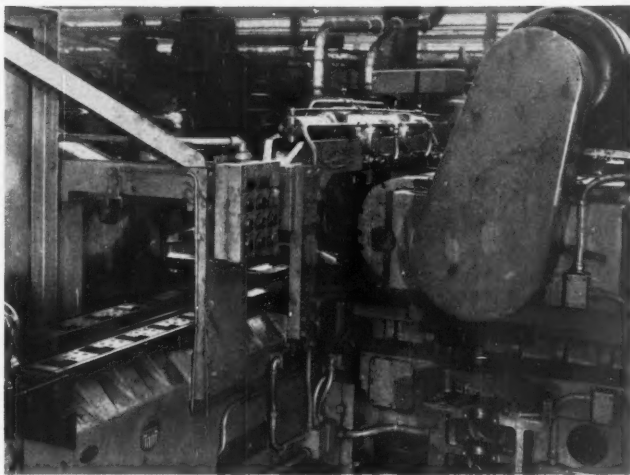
Control panel and loading station for Kearney and Trecker travelling-head milling machine, with single-stage transfer bar
